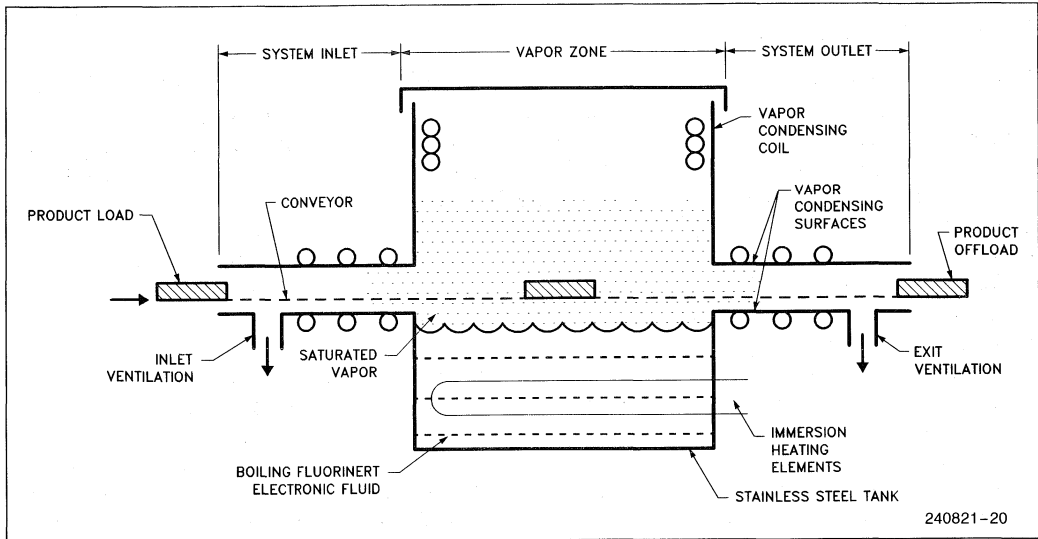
Schematic—In-Line Vapor Phase Soldering System for SMT
